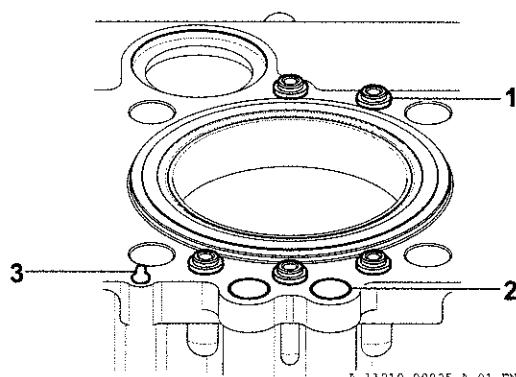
Installation location of the connection pipes for cooling water, lubricating oil and others
